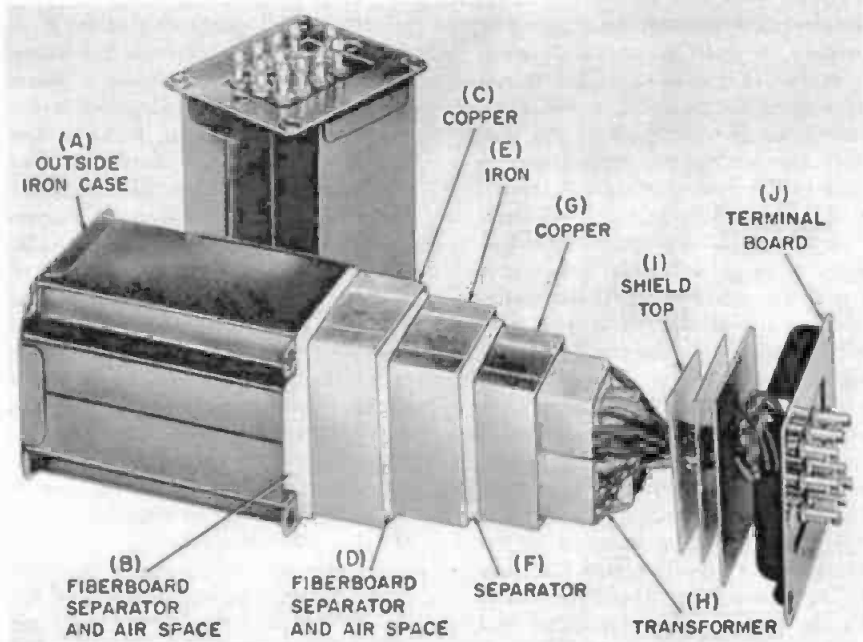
Transformer encased in nested-shield. (Courtesy, Kenyon Electronics Inc.)
